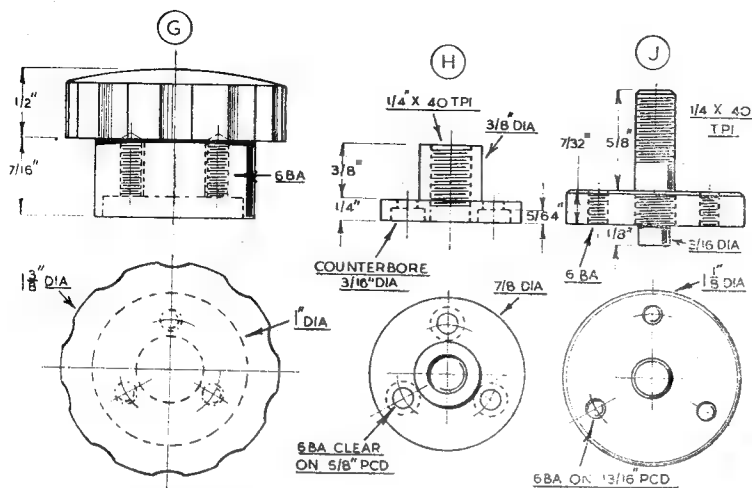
"G"—the clamping-knob; "H"—the inset bushing; "J"—the head spindle and collar
